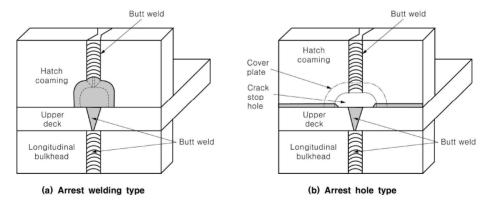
An example of joint arrangement for arresting the brittle crack propagation
